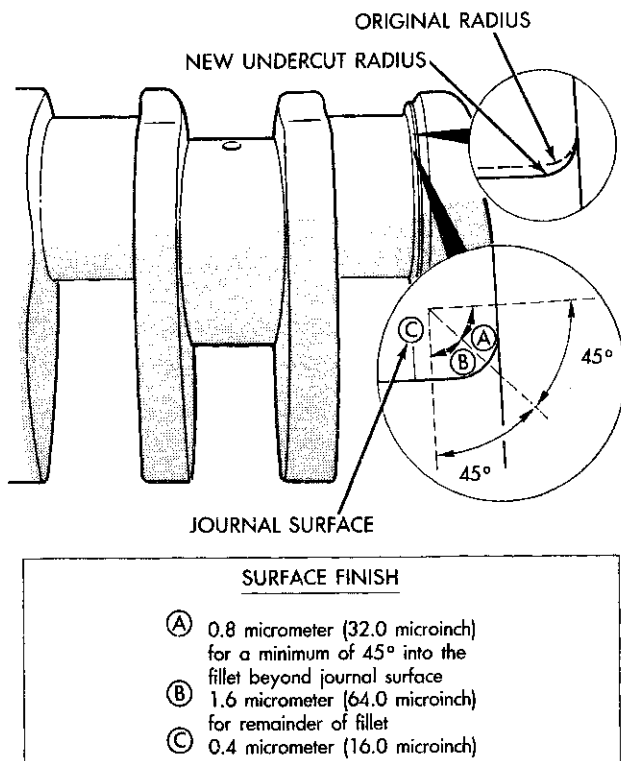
Grind Crankshaft Main Journal—Alternative Method
